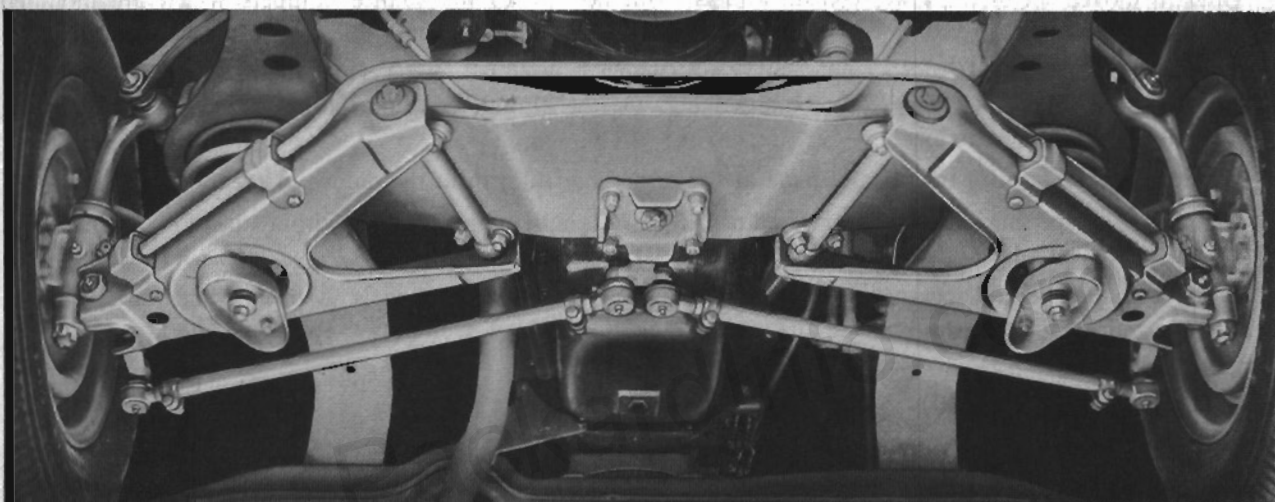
BOTTOM VIEW OF FRONT SUSPENSION
